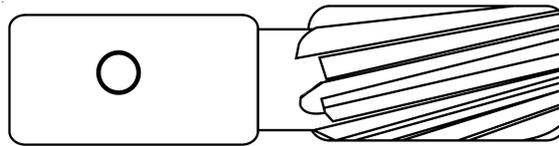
, A spiral fluted R.H. cut stub screw machine reamer.
